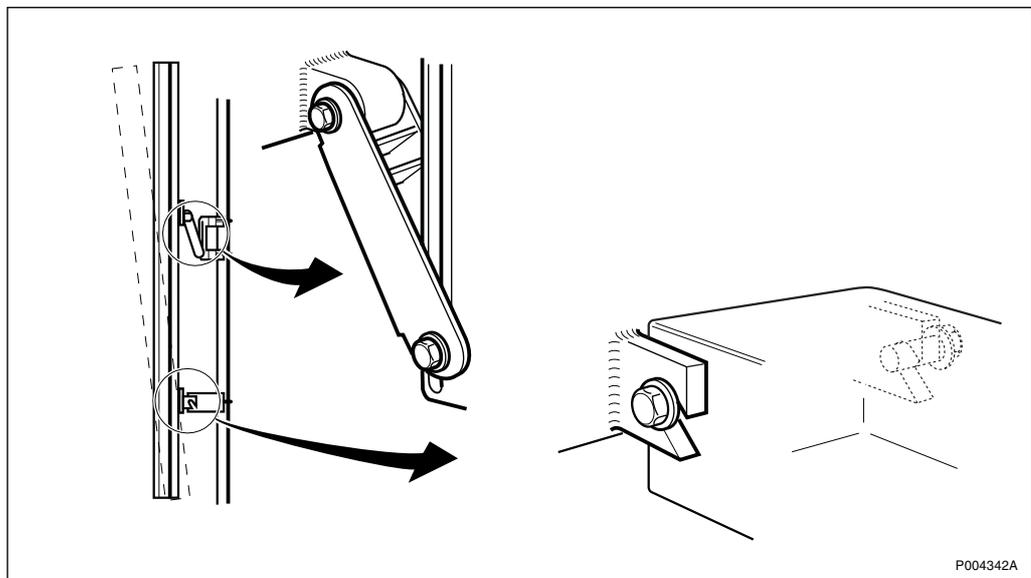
Fixing screws for the tilt linkage, and supporting screws on the lower pipe clamp
